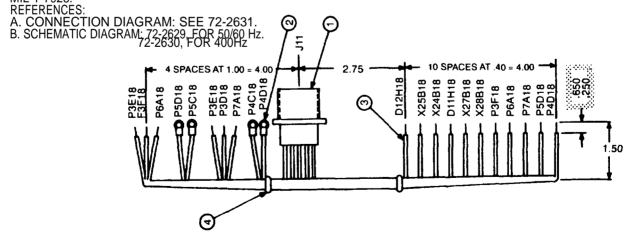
Static Exciter Wiring Harness, Dwg. No. 72-2628, Voltage Regulator Wiring Harness, Dwg. No. 72-2627, and Static Exciter Connection Wiring Diagram, Dwg. No. 2-2631 (Sheet 3 of 4)
